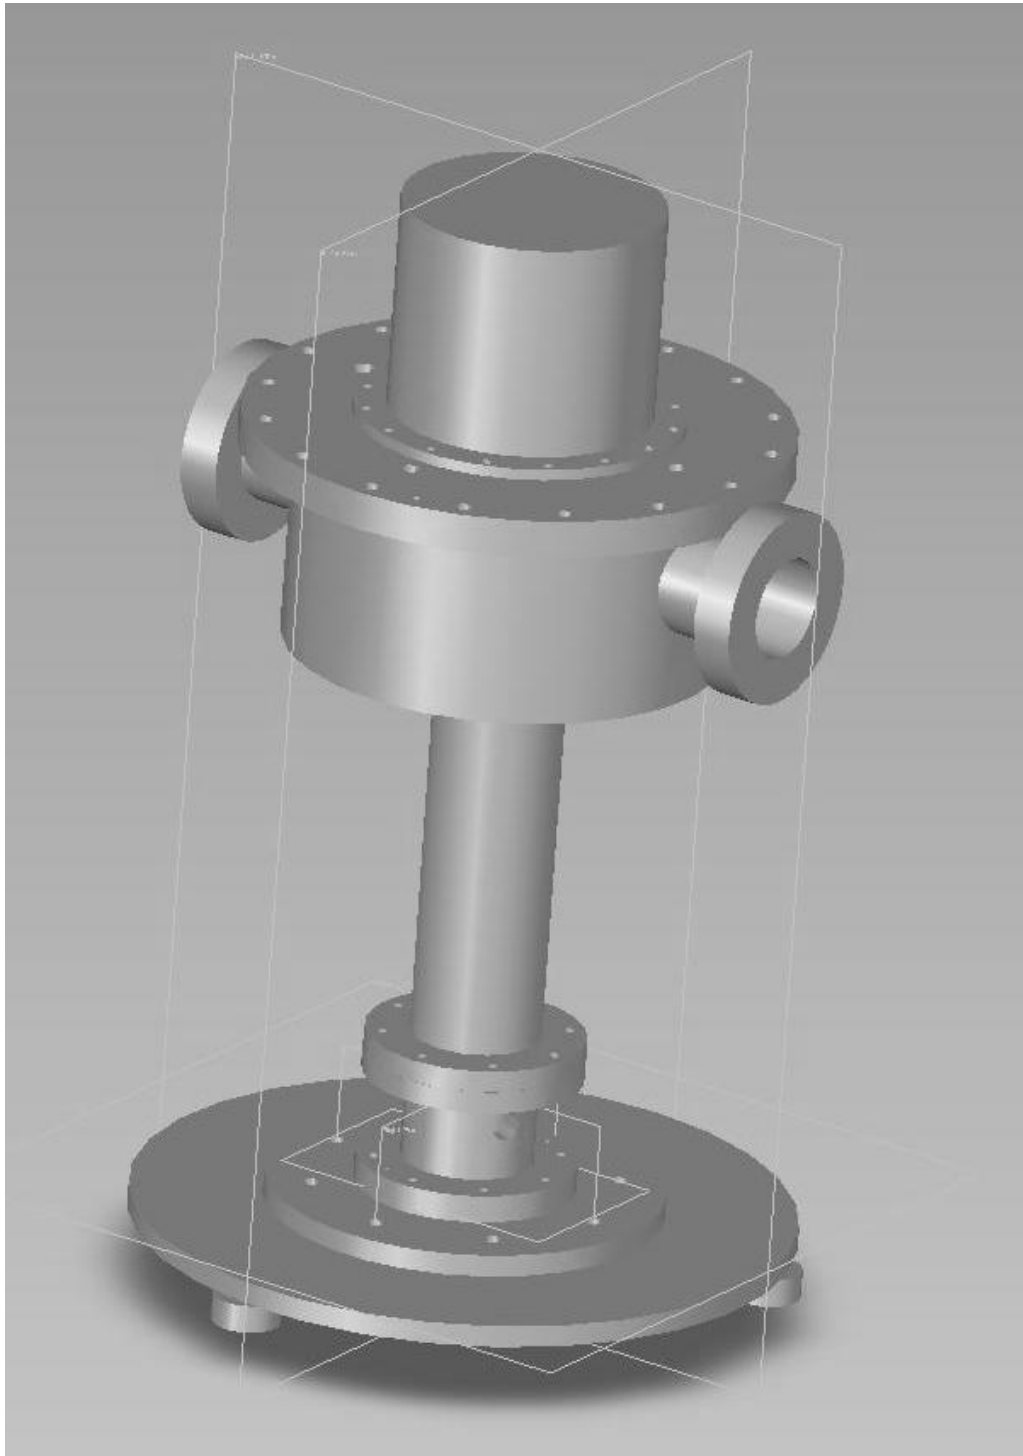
Three-dimensional CAD model of the resonator assembly
